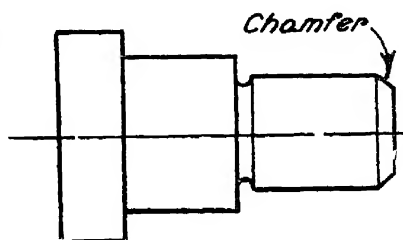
A JOB WHICH CAN BE EXECUTED BY A STRAIGHT PATTERN FORM TOOL
